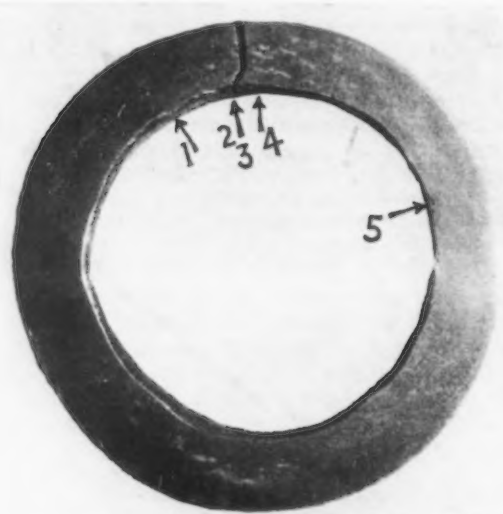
Macrostructure of Failed Drill Rod. Showing Positions of Fractures. Half original size
